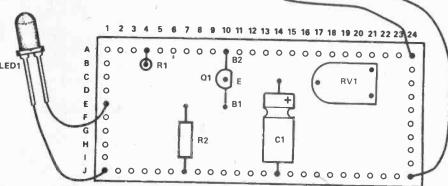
Veroboard layout, underside view and connection details. Note there are no track breaks.
